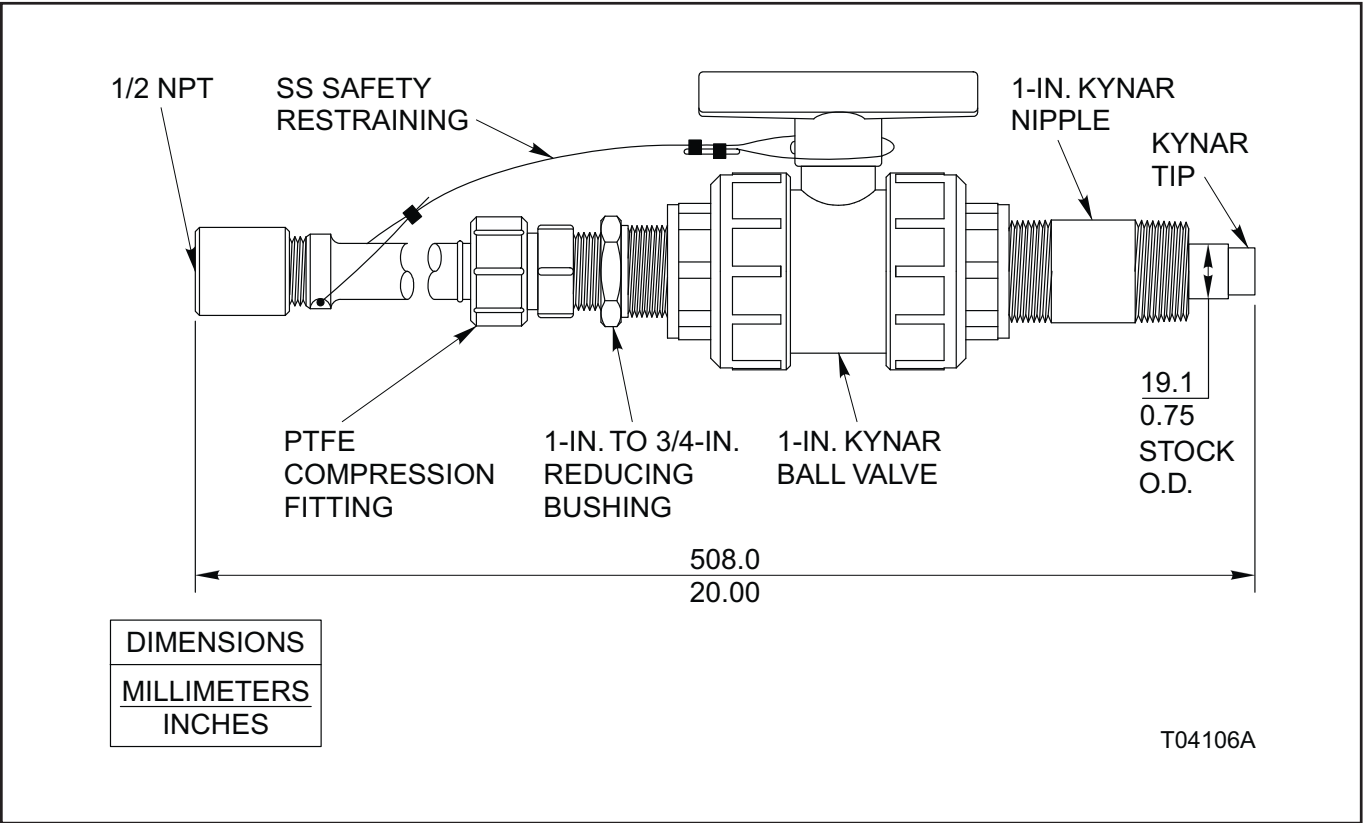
Endura TB4683 Hot Tap Style Dimensions
